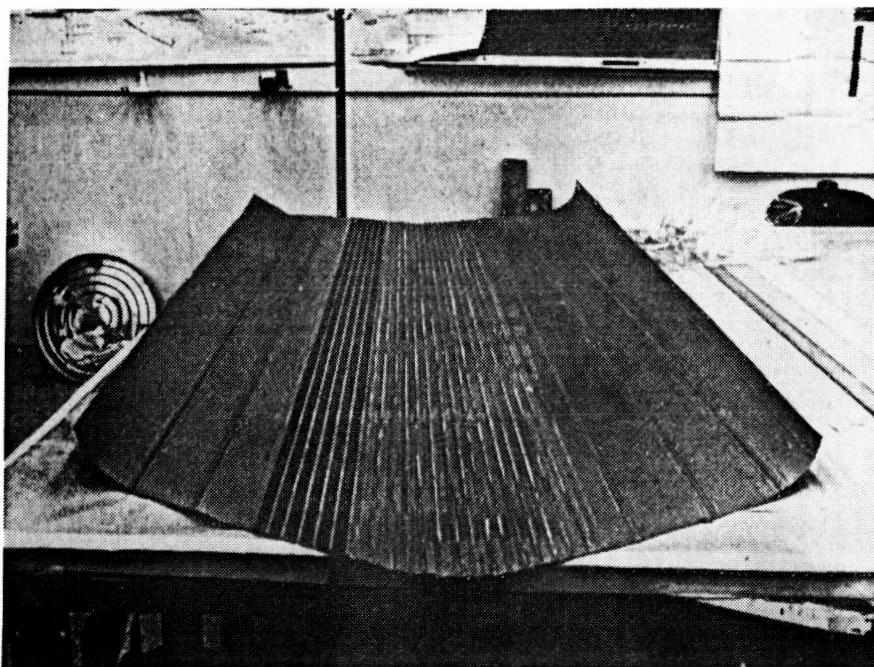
Peel Ply Subassembly with Adhesive Applied and Filler Stacks being Applied
